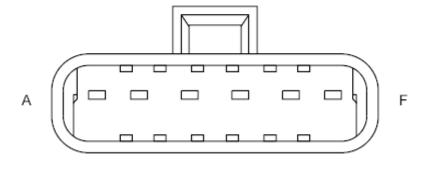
Checking Valve Cover Pass Through Harness Circuits Courtesy of CHRYSLER GROUP, LLC
